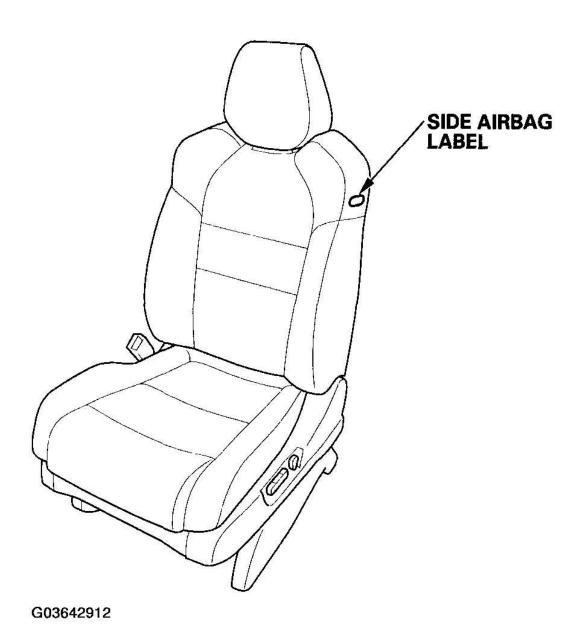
Identifying Side Airbag Label Courtesy of AMERICAN HONDA MOTOR CO., INC.
